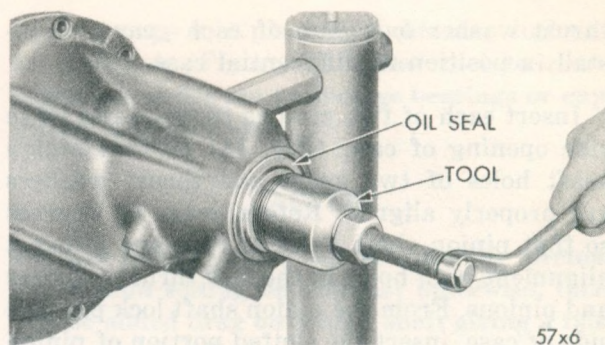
Removing Drive Pinion Bearing Oil Seal
